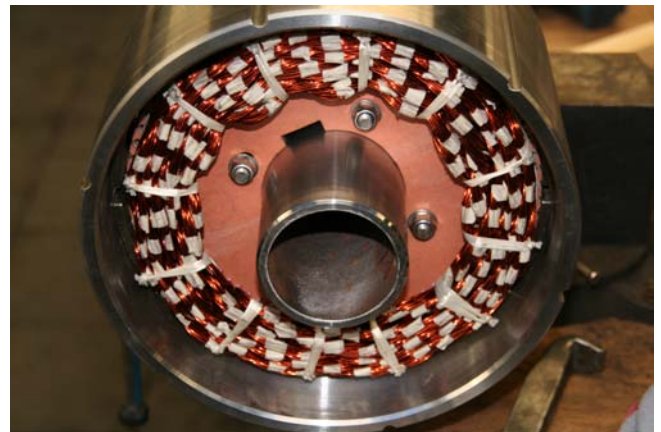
Wound armature prototype with a distributed winding configuration inserted in the external rotor.
